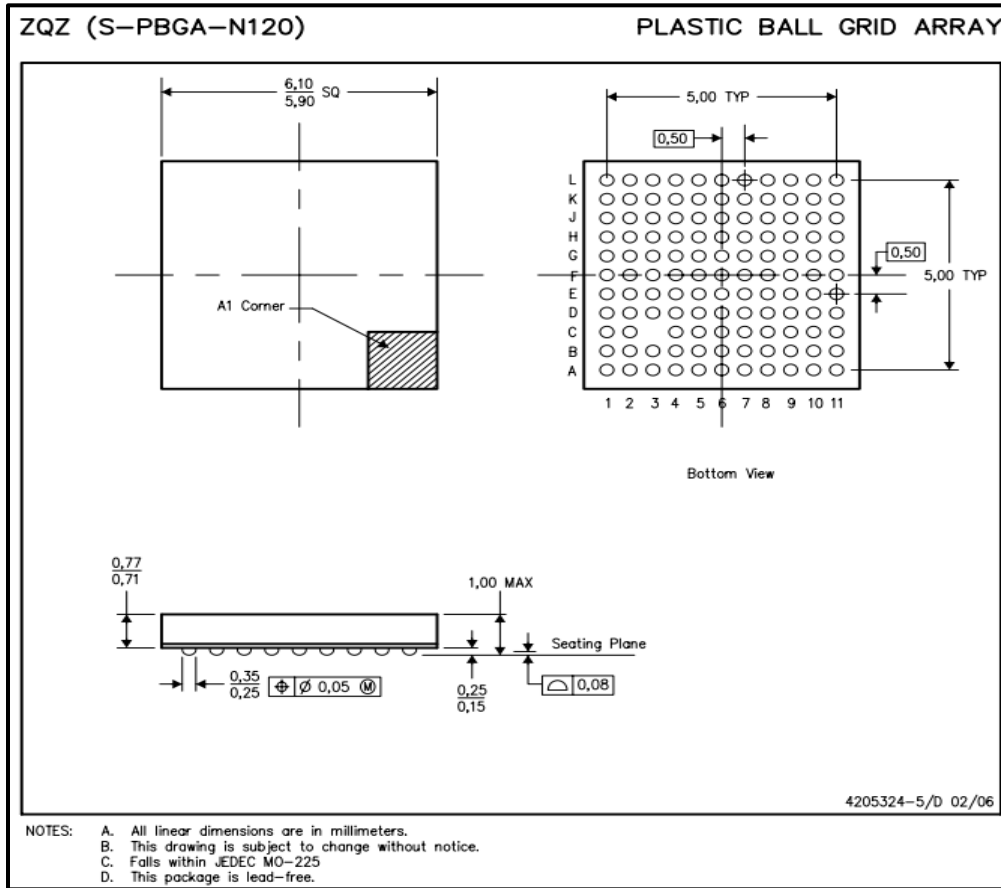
Micro star BGA drawing used to obtain unknown dimensions of BGA package
